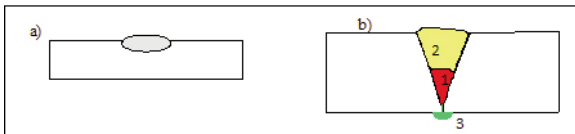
Schematic illustration of specimens for: a) surfacing, b) V-joint welding pass sequence.
